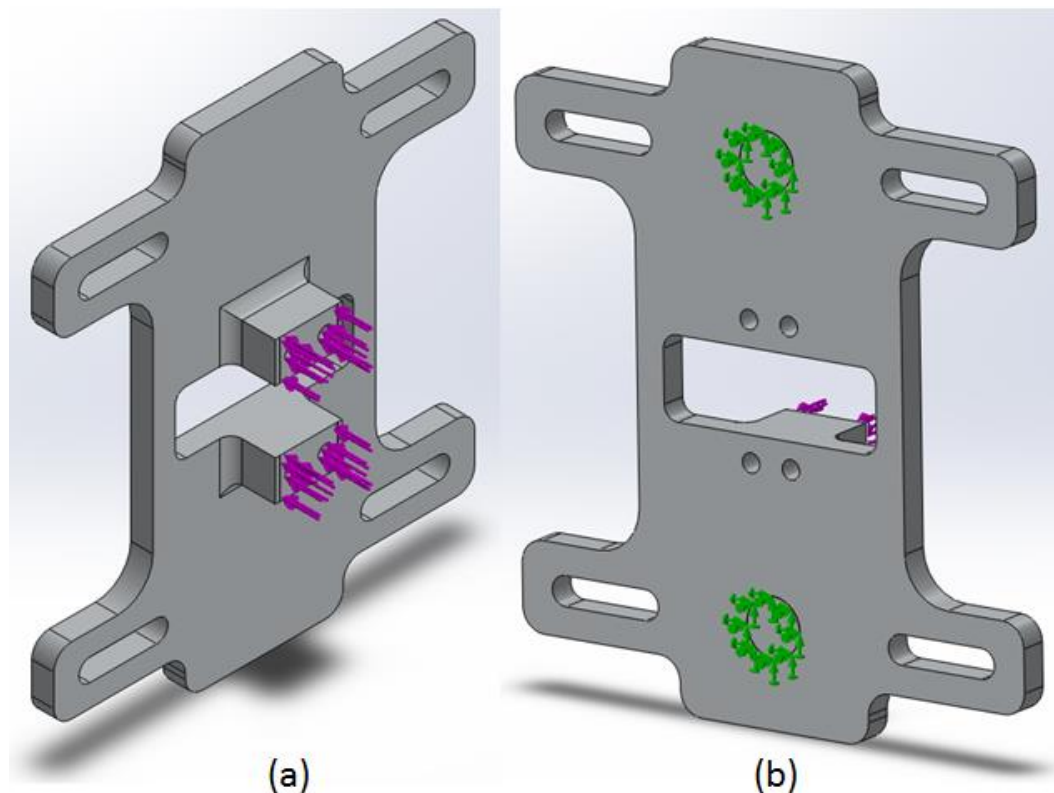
Posterior Fixture Front Plate Loading/Fixture Conditions - Part (a) shows a front isometric view with the applied force while part (b) shows a back isometric view with the surface which was fixed.
